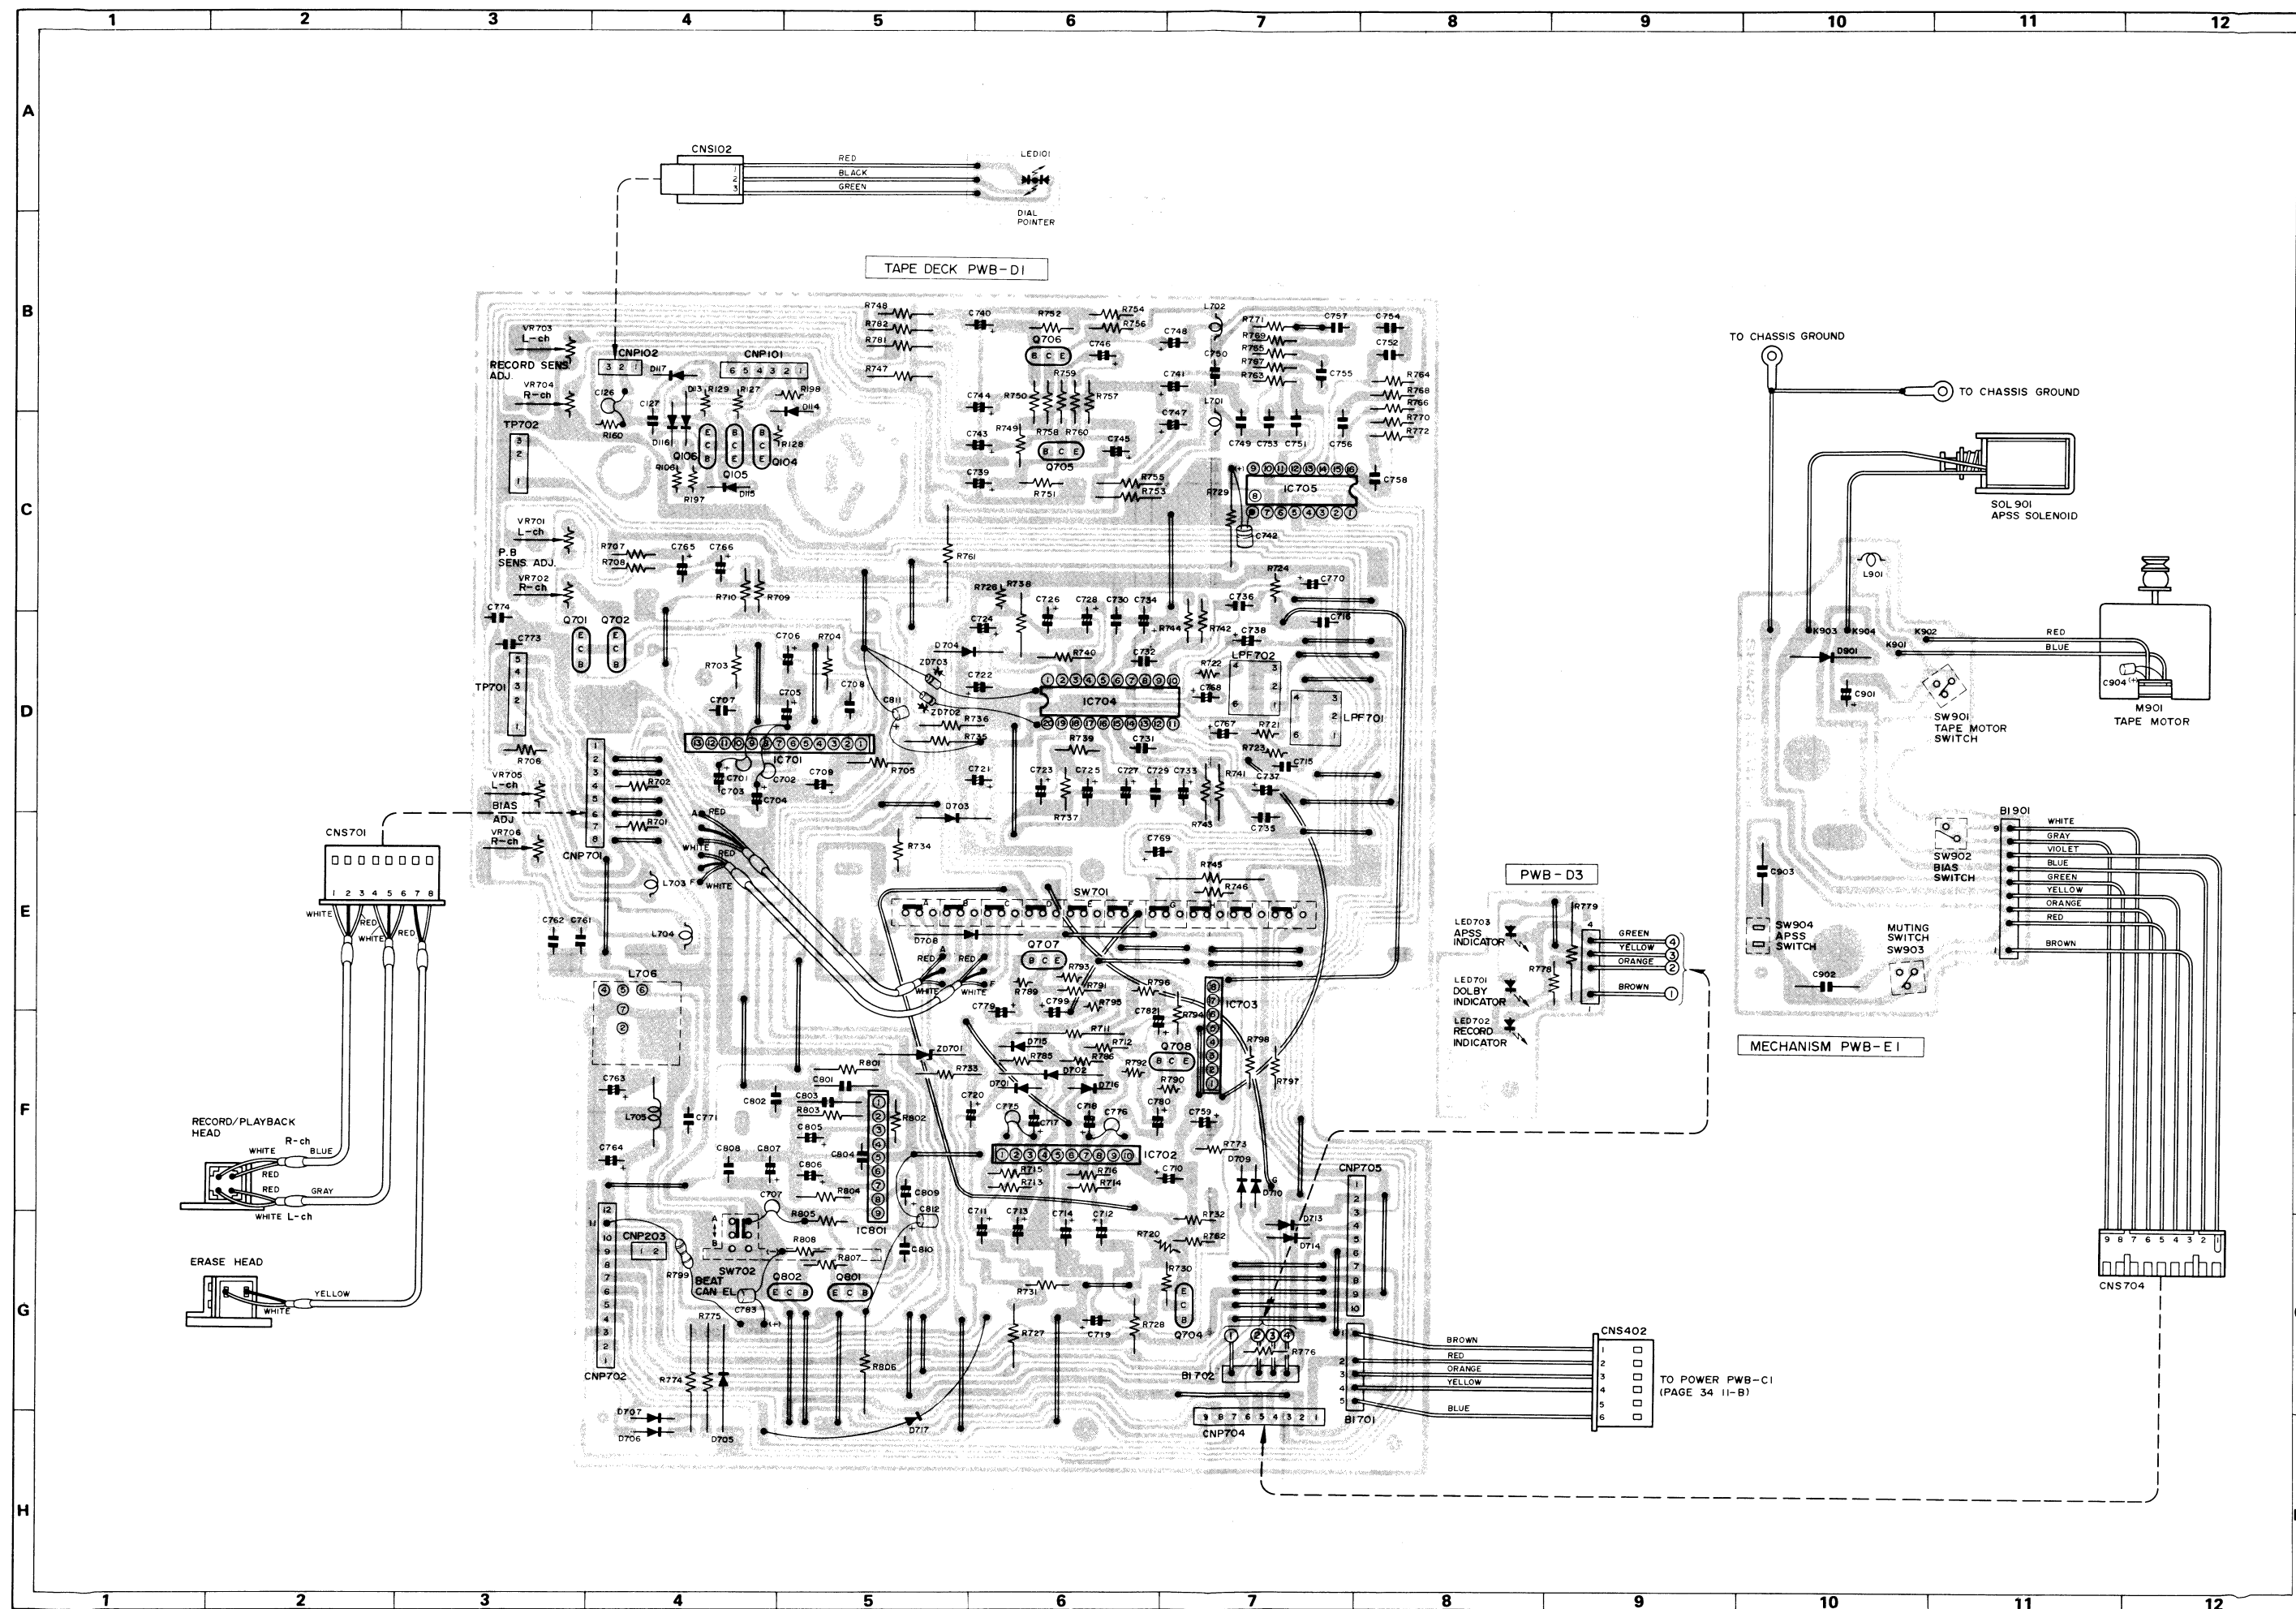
WIRING SIDE OF P.W. BOARD (3/4)
